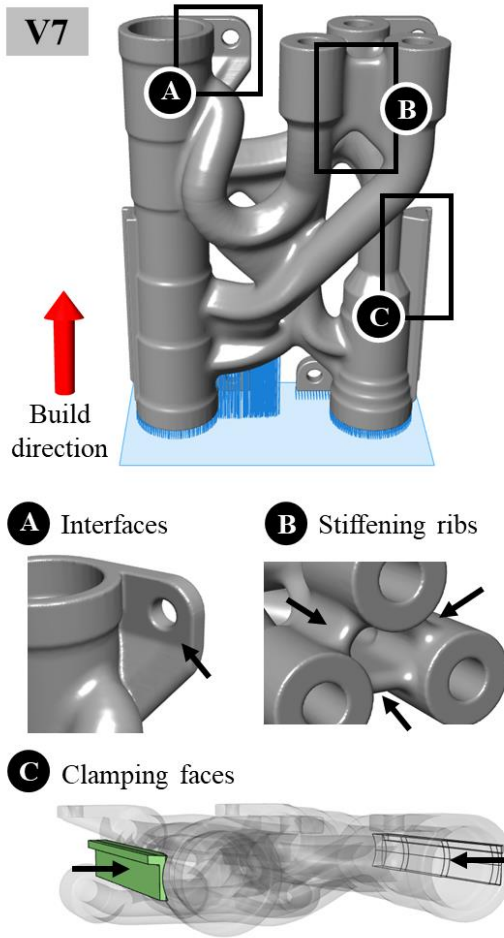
Final part design of variant V7, including detailed features such as interfaces for part attachment, stiffening ribs for reinforcement, and clamping faces for machining.
